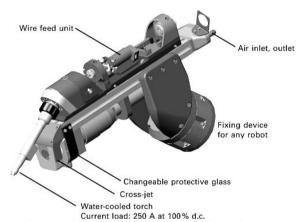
Schematic representation of a laser beam welding/GMAW hybrid welding head.
